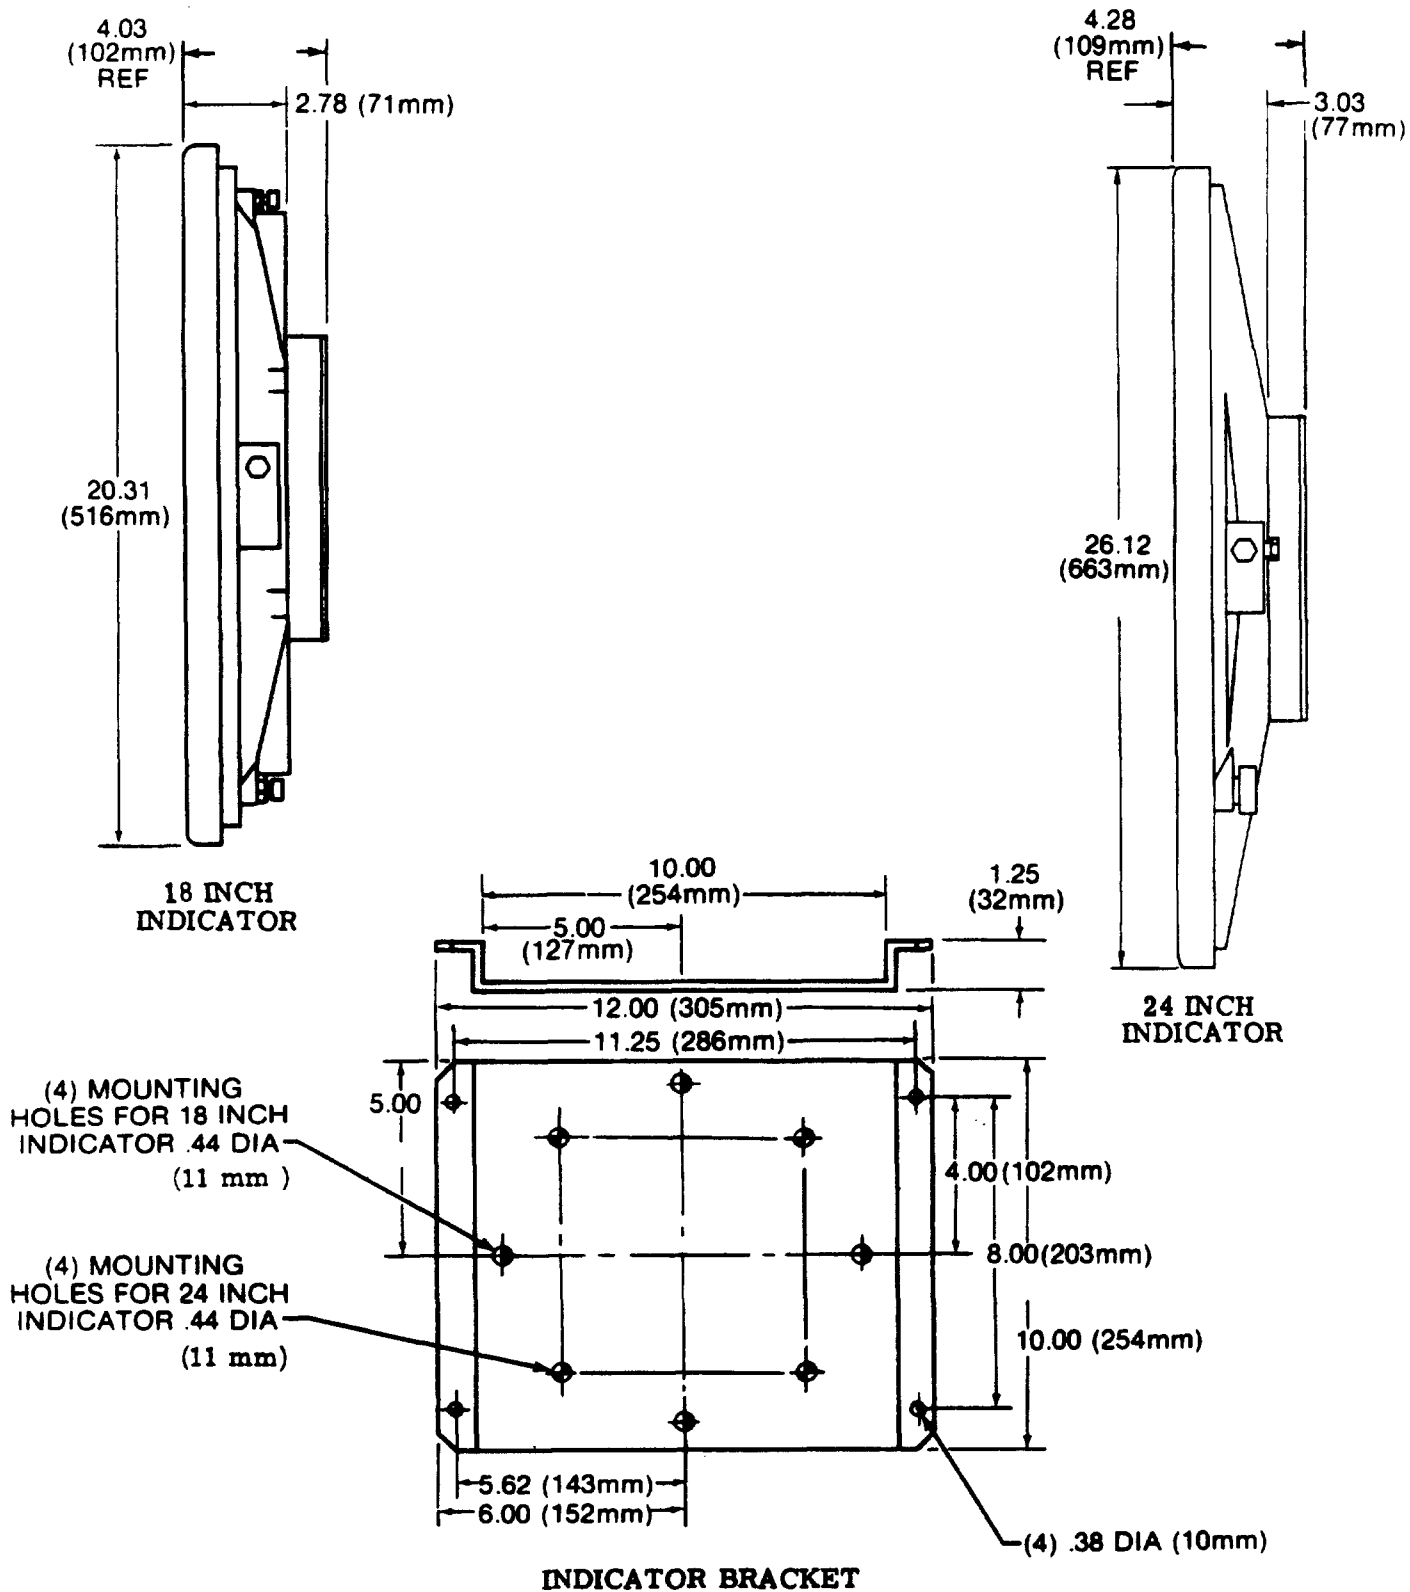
Overall Dimensions for 18 and 24 Inch Indicator and A1049 Bracket Installation
